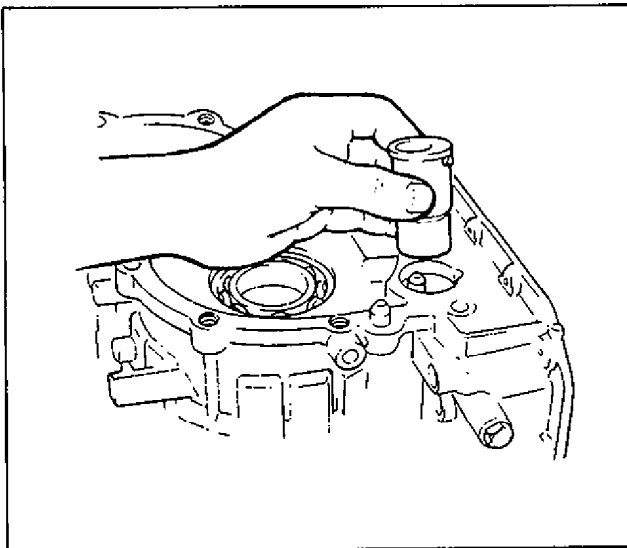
B-177 Installing Parking Lock Pawl Sleeve
